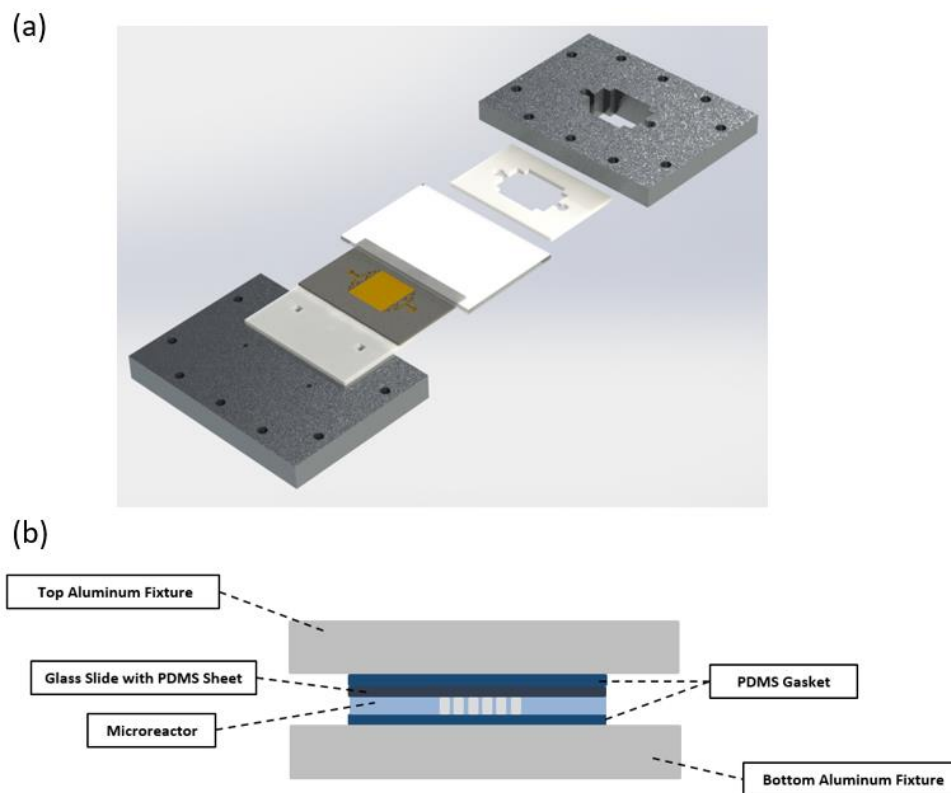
Presentation of the experiment fixture: (a) a CAD model to show the exploded view. From up to down, layers are top aluminum fixture, top thick PDMS gasket, a quartz slide bonded by a thin PDMS gasket, microreactor chip, bottom thick PDMS gasket, bottom aluminum fixture; (b) a side-view schematic of all layers.
